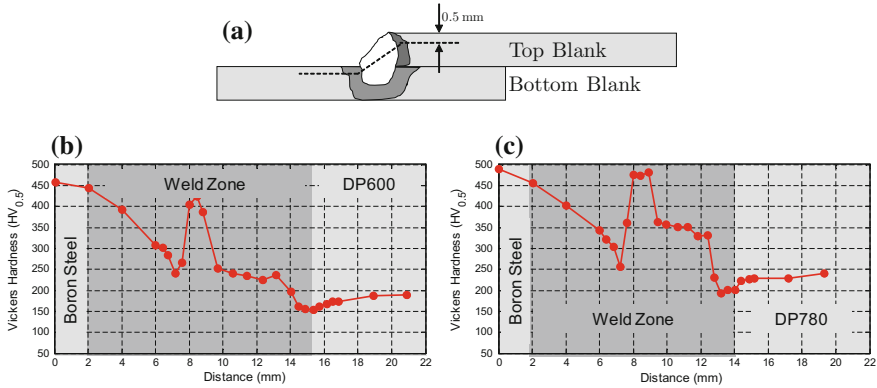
a Schematic view of an arc welded lap joint; hardness profile over the dashed line in: b DP600-22MnB5, c DP780-22MnB5 welds (re-created after [65, 66])
